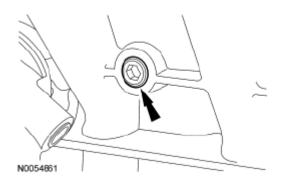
Locating RH Catalytic Converter Support Bracket Bolts Courtesy of FORD MOTOR CO.
